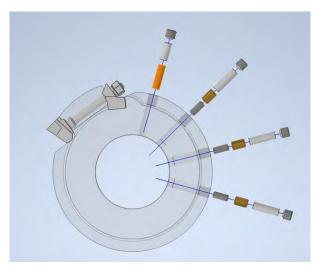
Shear Pins in PM-GM Ring (Exploded View)
